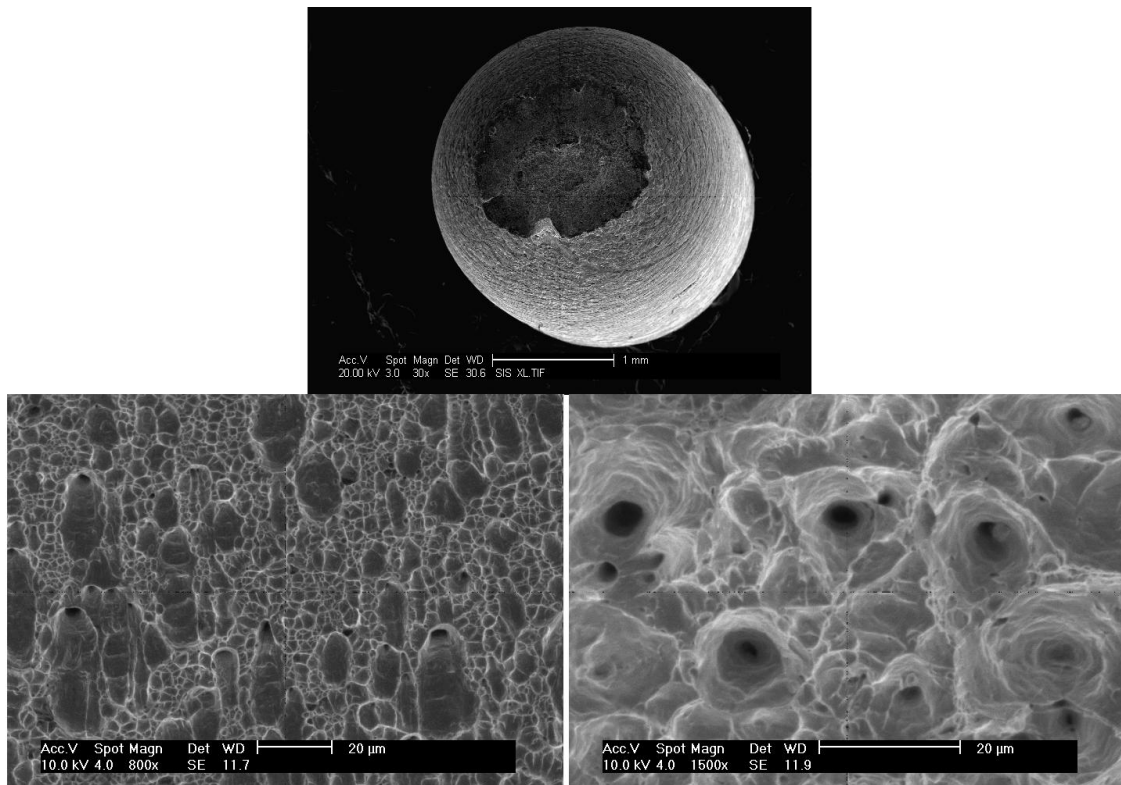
Macrographs at of the fracture surface of super DSS Ferralium 255 specimen showing the necking and microvoid coalescence resulting from the air test
